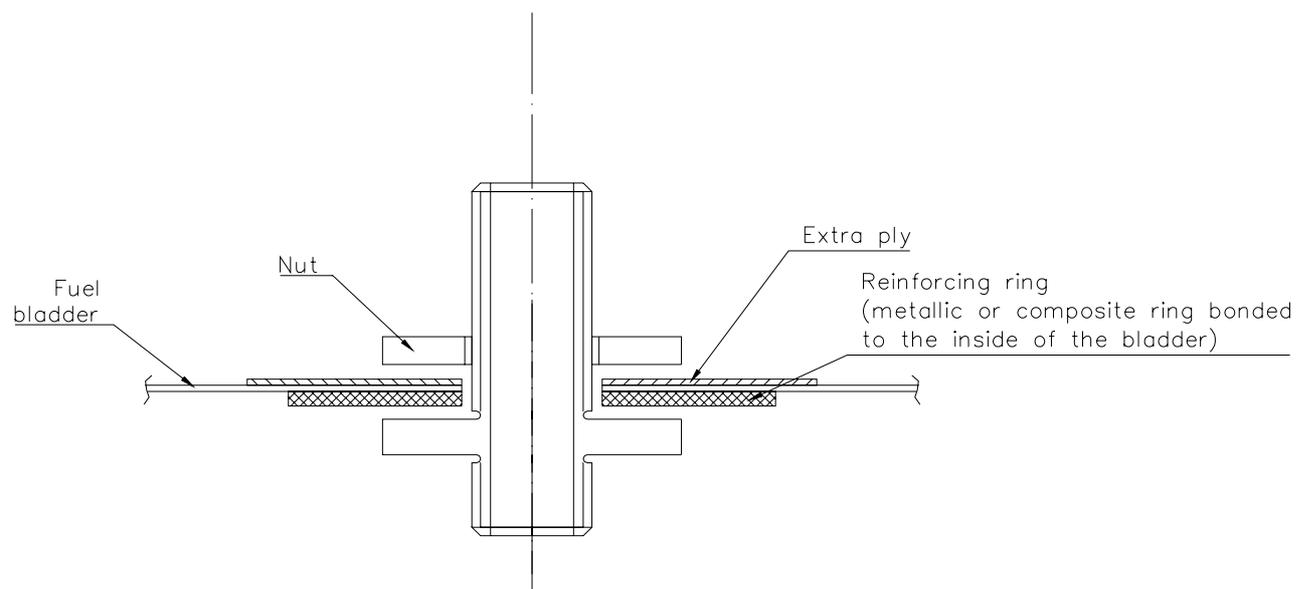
Type of joint authorised when available space does not allow for a bolt ring
